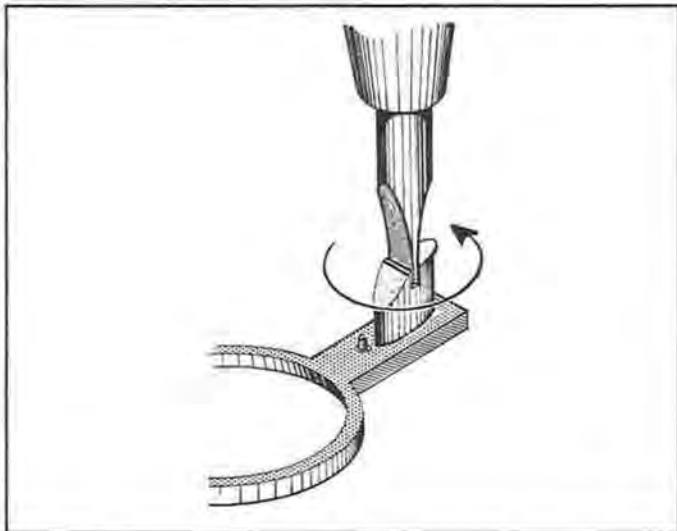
First step in removing the pin is to twist regulator key completely around with a sharp, well-fitting screwdriver.
